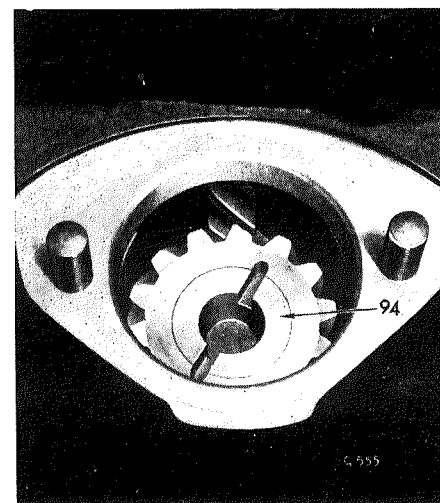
Position of slot in distributor drive gear with No. 1 piston at T.D.C. on compression stroke
